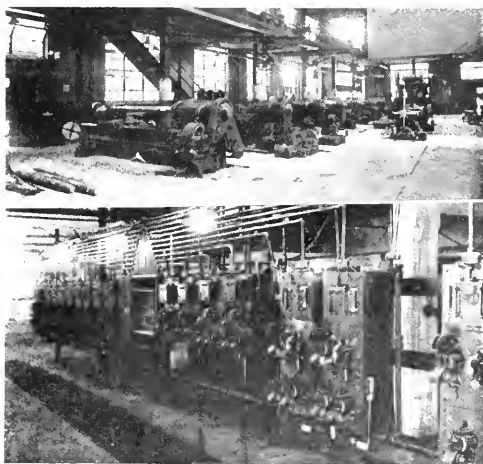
A ROW OF ENGINE LATHES IN THE MACHINE SHOP
